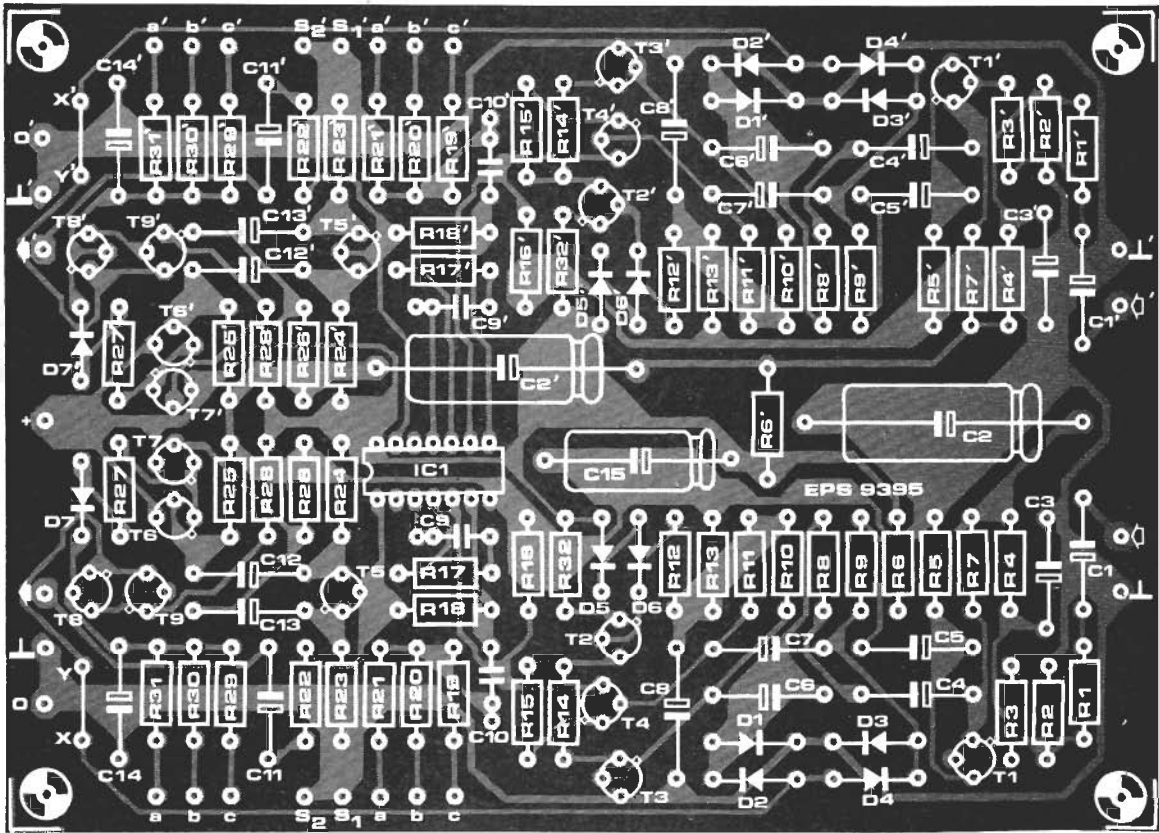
and 9. Printed circuit board and component layout for a stereo version of the compressor. (EPS 9395)
